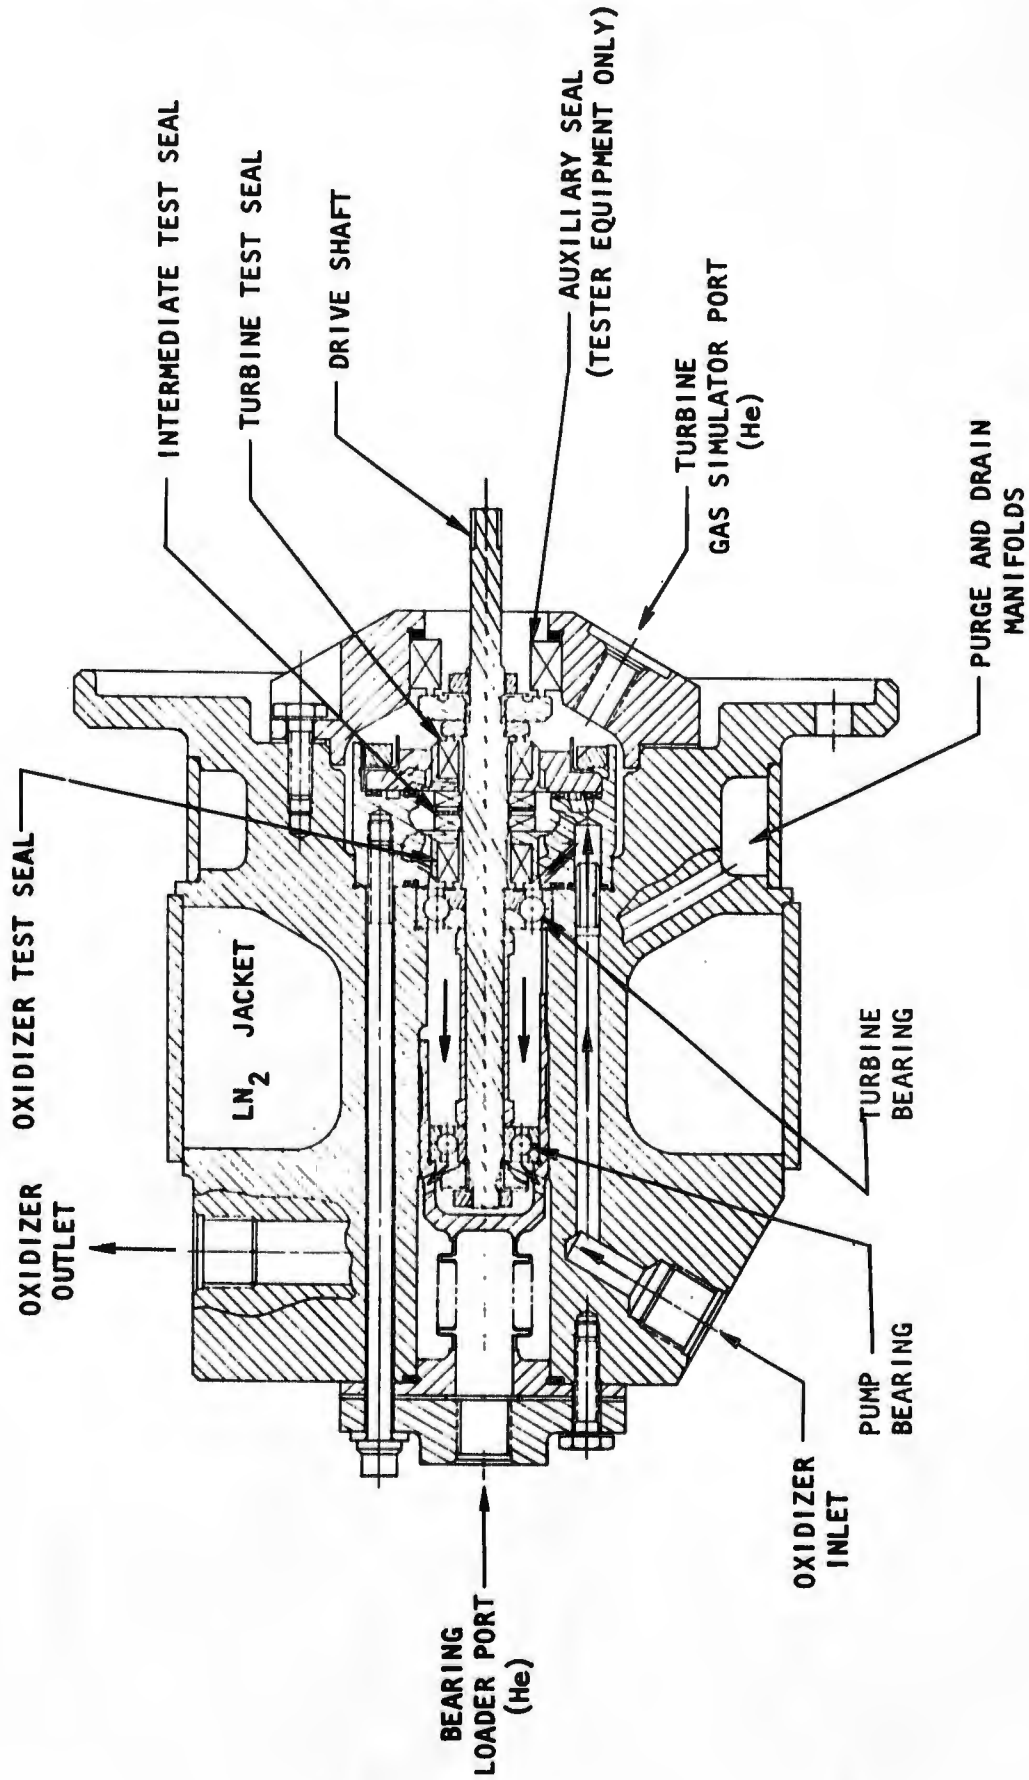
Secondary Bearing and Seal Tester Assembly (U)
